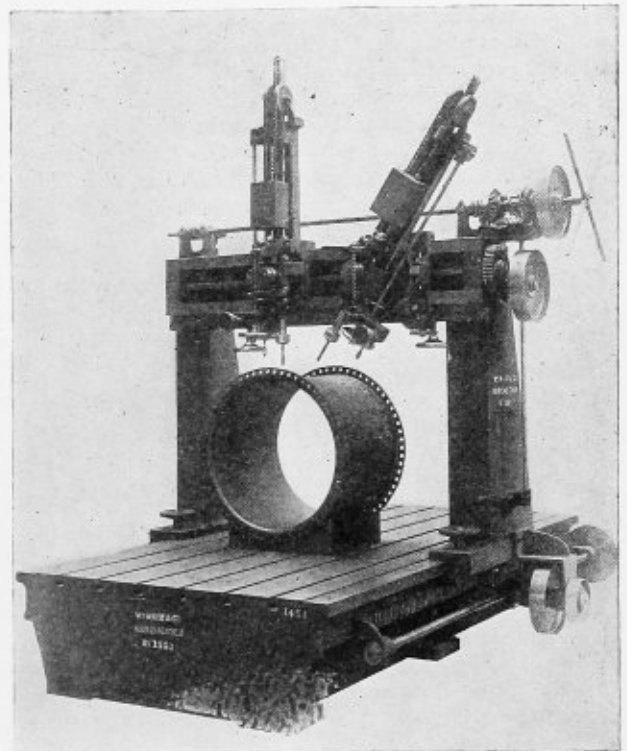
Trepanning Machine for Cutting Openings in End Plates
